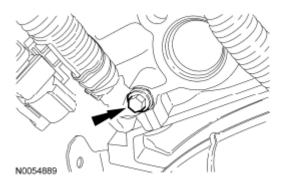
Locating Wiring Harness Retainer Bolt Courtesy of FORD MOTOR CO.
